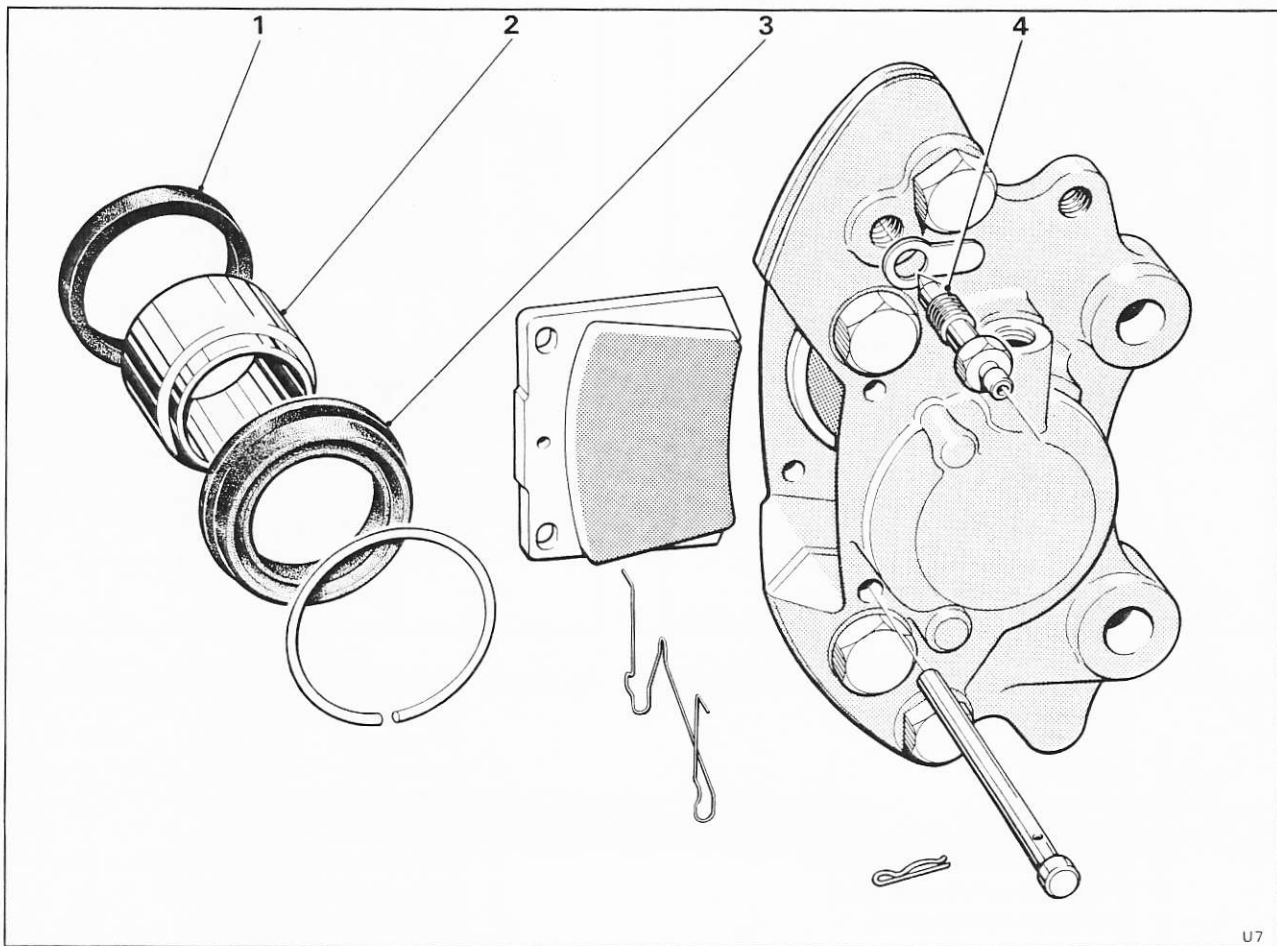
Front wheel brake caliper (left-hand trailing caliper shown)
